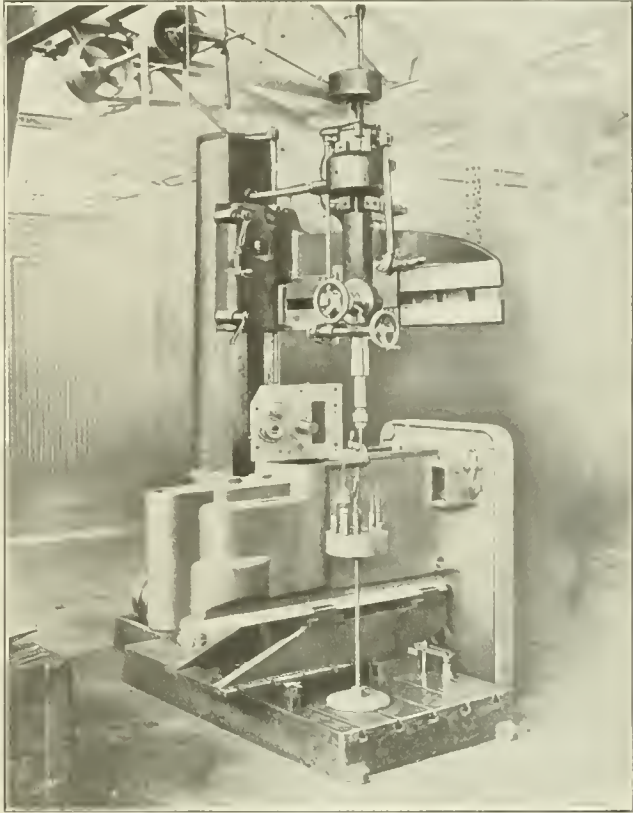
Operation 11. Drilling Small Holes. Note Locating Plugs on Jig shown standing on Edge
